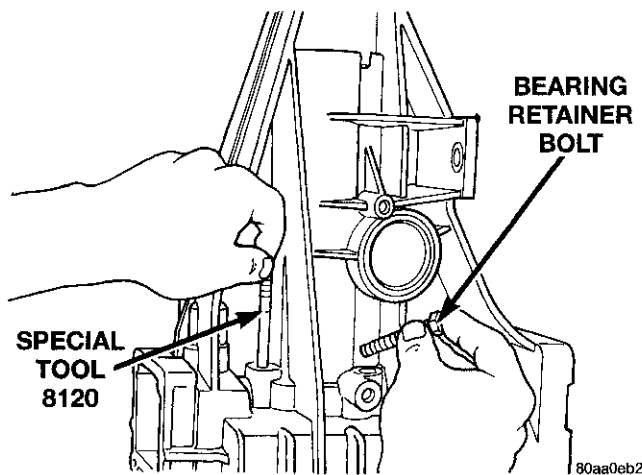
Removing Pilot Stud Tool And Installing Retainer Bolts—2WD
